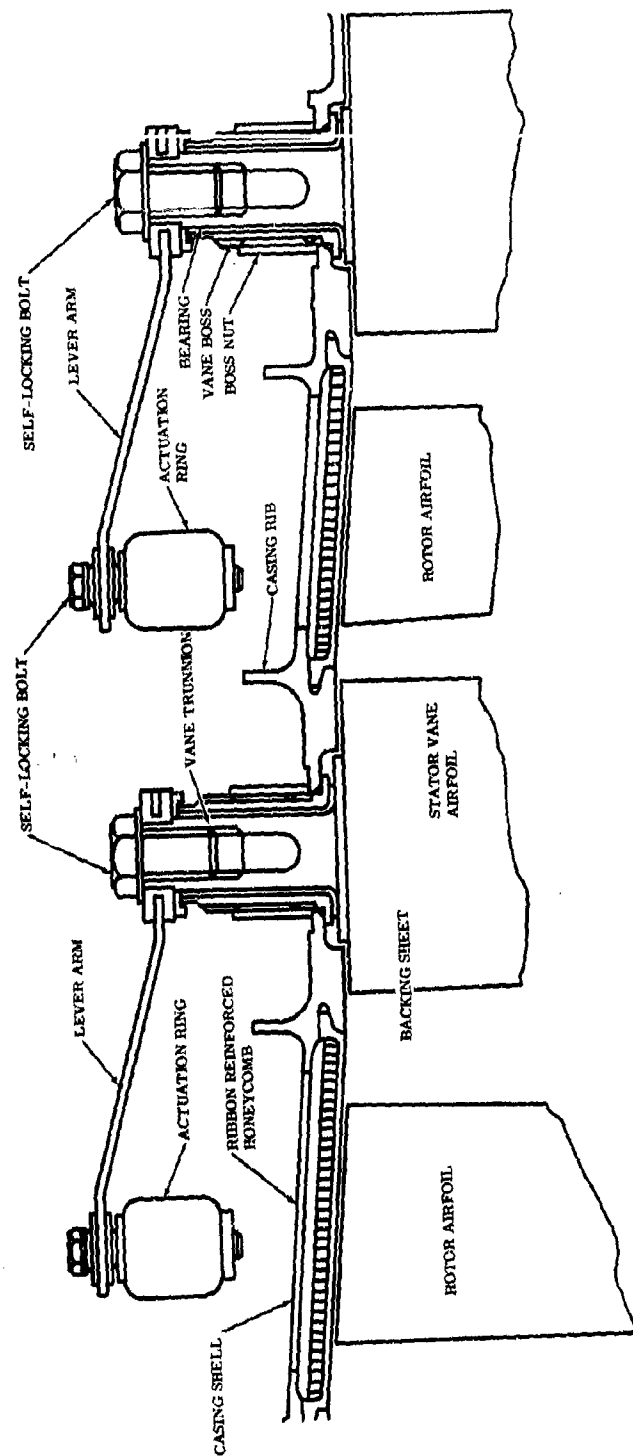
BLADE CONTAINMENT CONFIGURATION, STAGES 4-9. Blade Containment Configuration - Stages 4 thru 9. Liner Configuration and Attachment - Stages 4 thru 9. Vane Boss - Casing Assembly - Typical all Variable Stages. Vane - Lever - Actuation Ring Assembly on all Variable Stages
